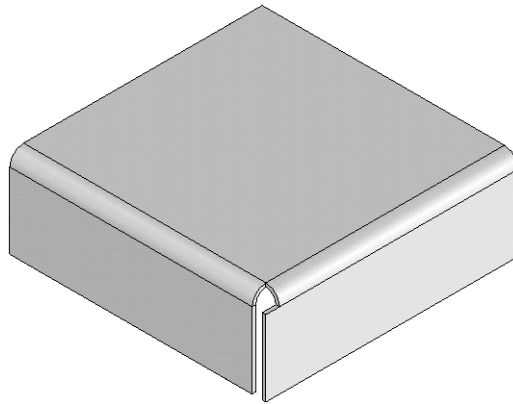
Edge flange created with the Trim side bends check box selected
